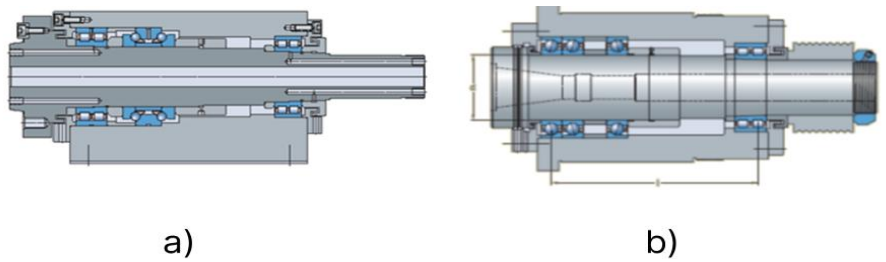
a) Box-shaped spindle b) Tube-shaped spindle
